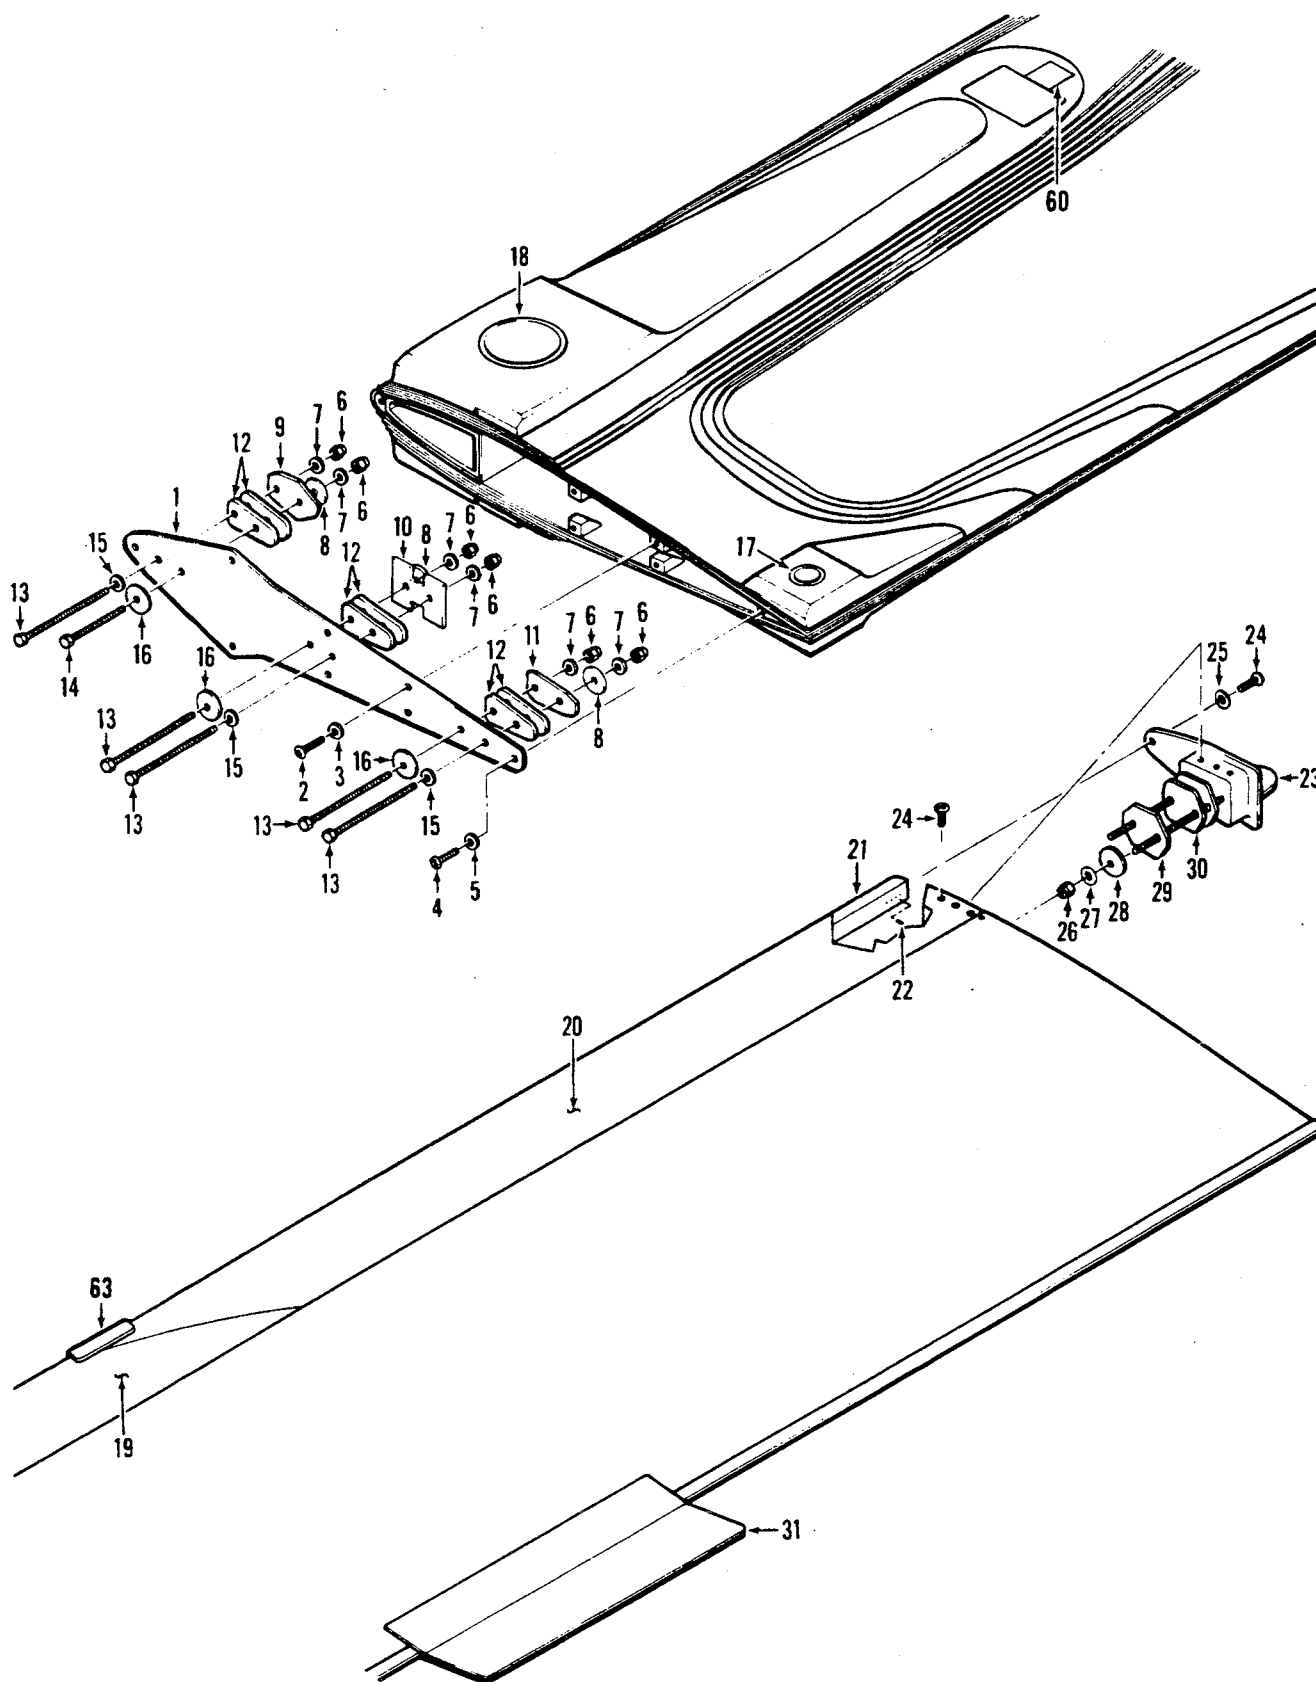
Main Rotor Blade Assembly (Sheet 1 of 4)
